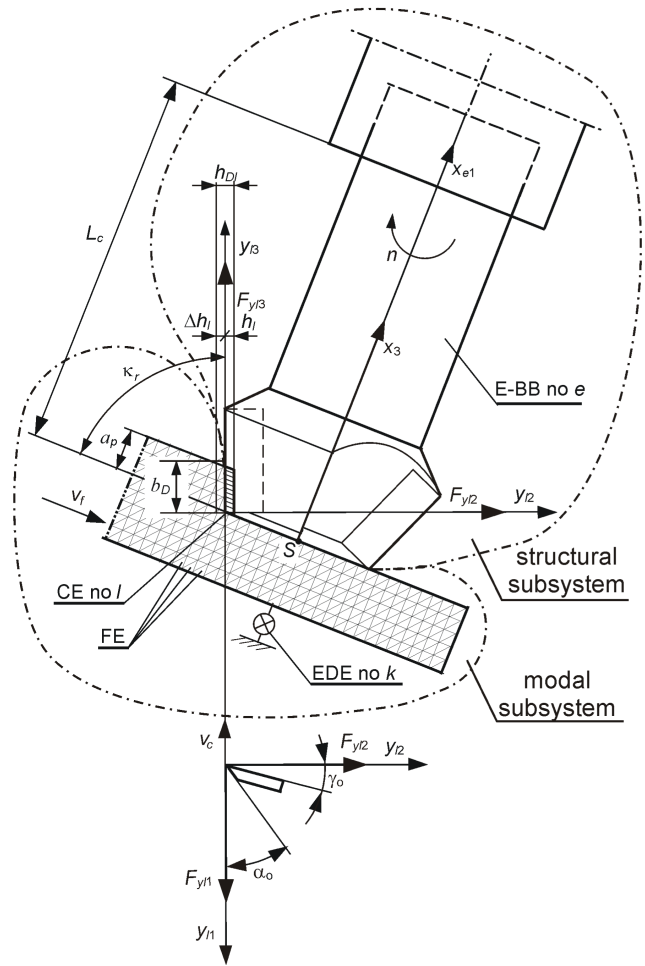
Scheme of a face milling of a flexible workpiece.
